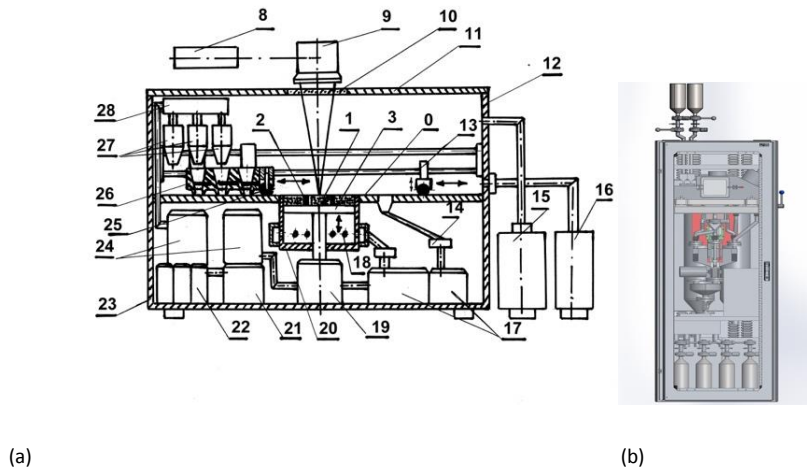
(a) Selective laser melting machine design.(b)- sketch project
